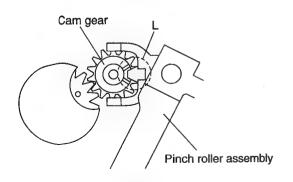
Gear Positioning 5 (Top Side View)
